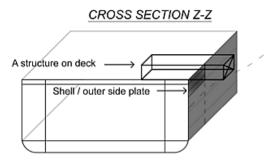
Outer side plate of concern in the case where a structure is sticking out from the deck. Designed in AutoCAD
